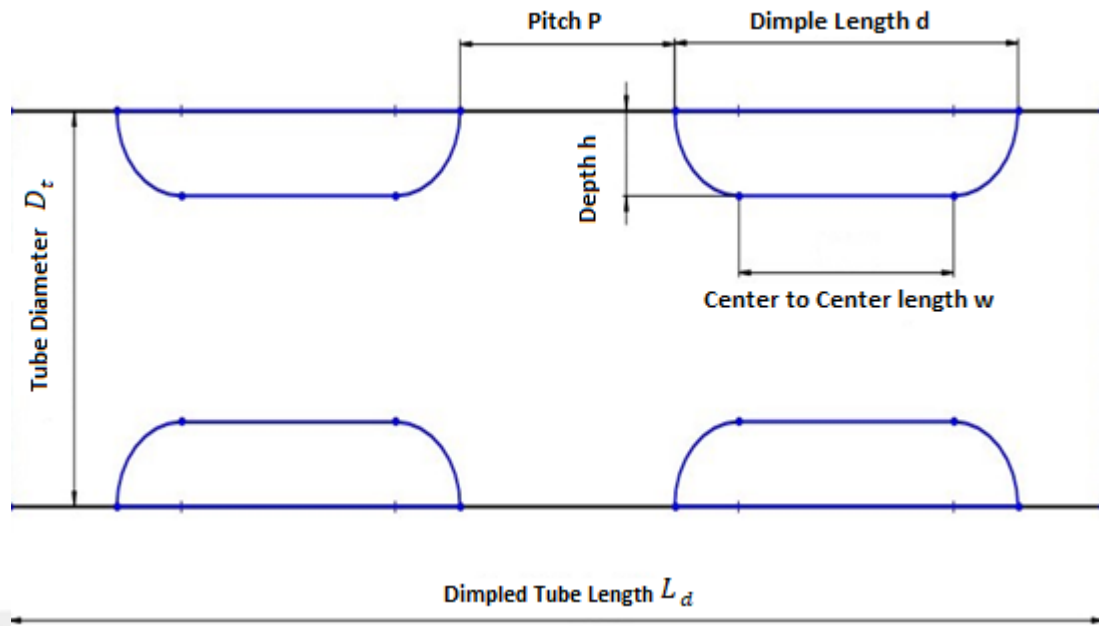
Schematic for the geometrical parameters of the dimpled tube.
